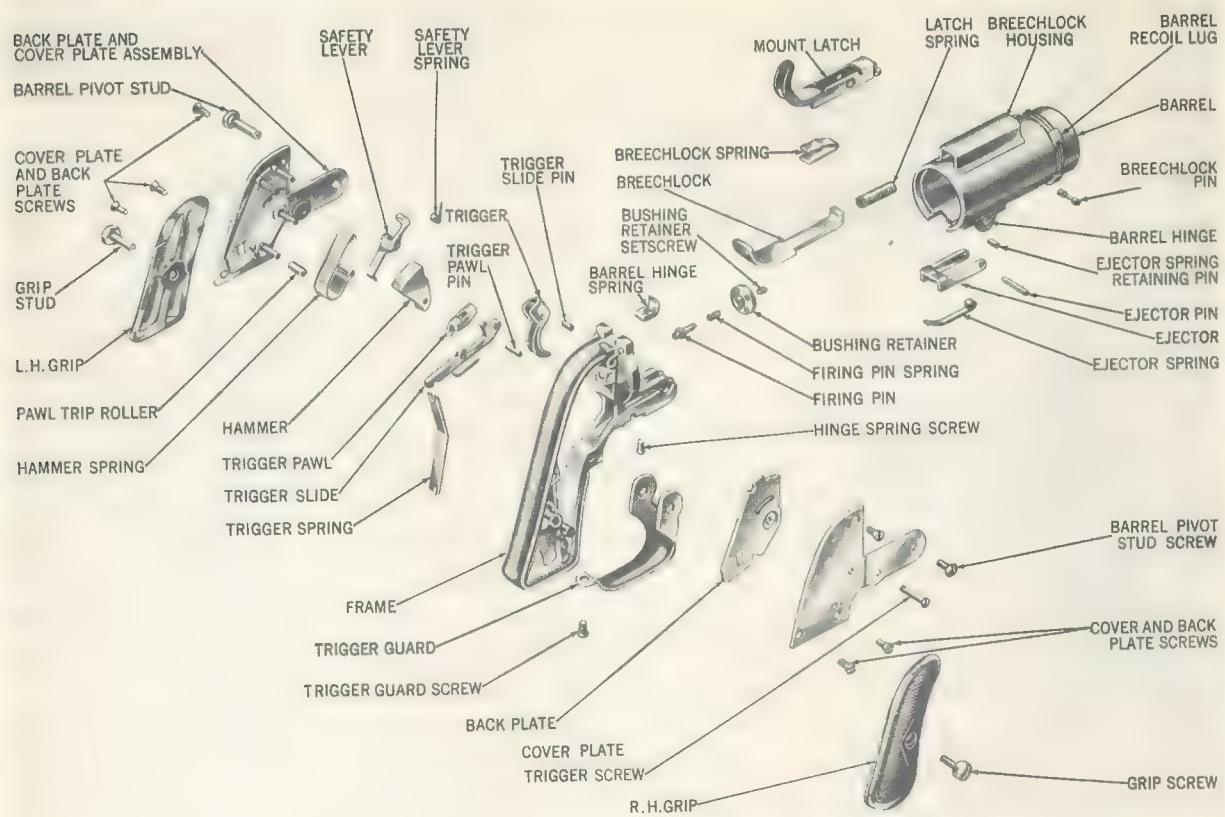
Pyrotechnic Pistol M8, Exploded View.
